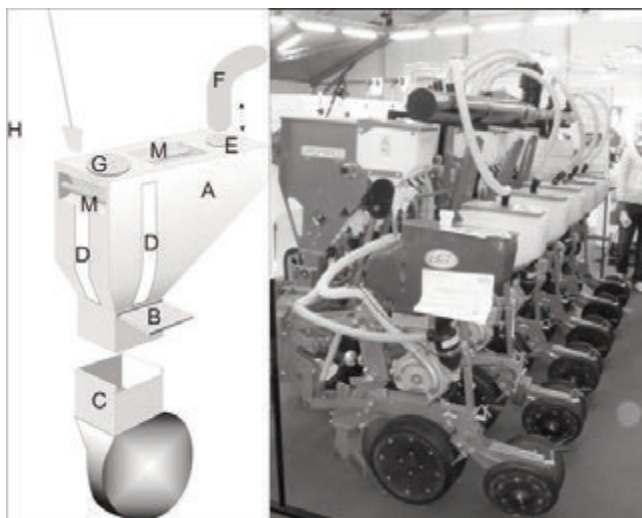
The innovative hopper. Left: layout. Right: mounted on the drill.
